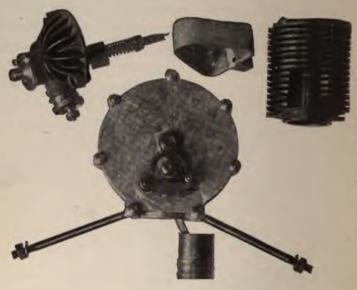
PARTS OF THE CARRIAGE MOTOR.
